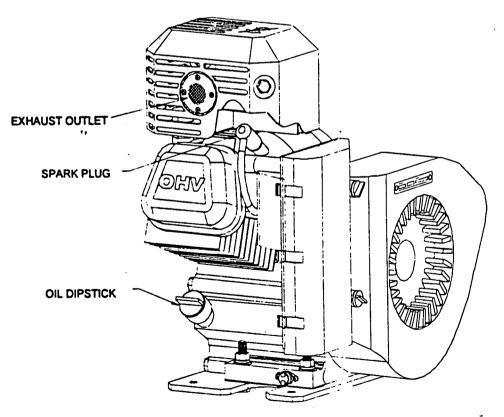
3 kW Generator Set Component Locations - Cylinder Side
